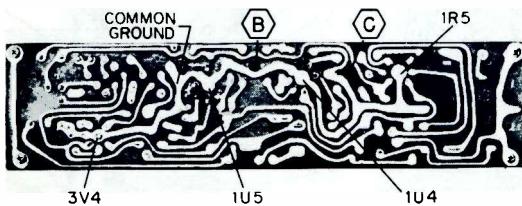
Bottom View of Chassis 200. Tube Locations and Alignment Points Shown.
